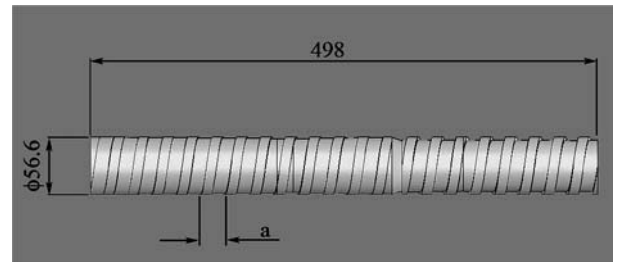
New designed rapeseed oil squeezing spiral shaft
